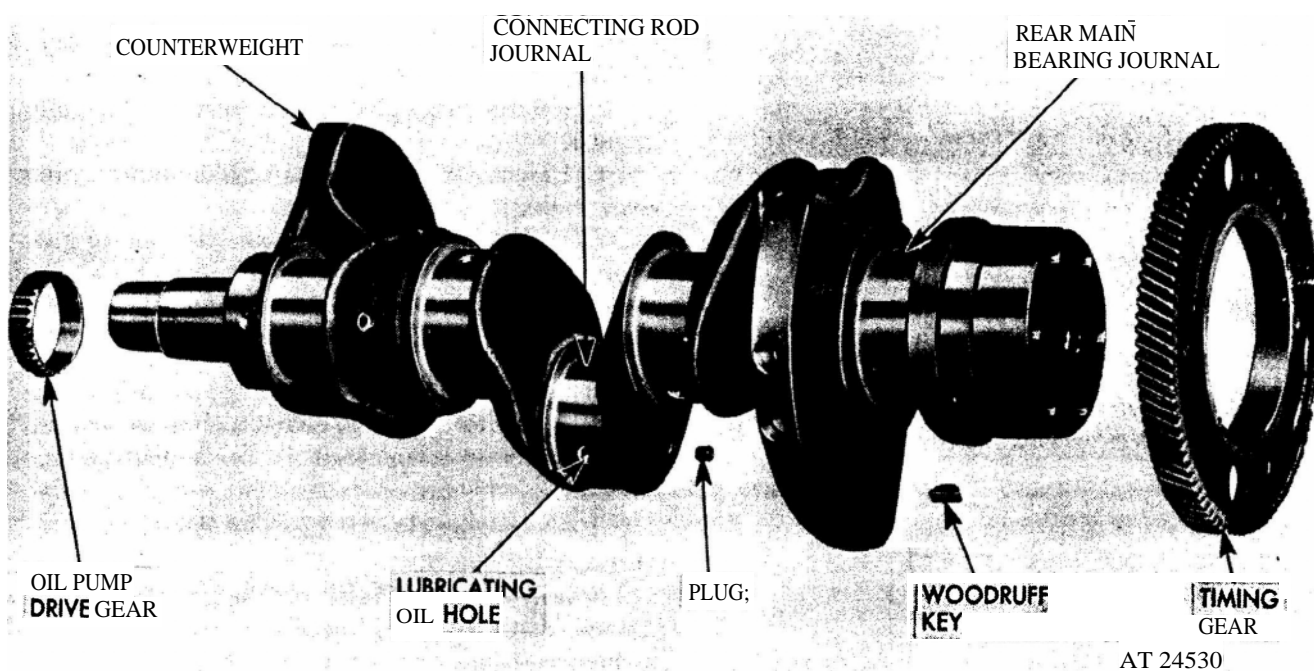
Crankshaft details and relative location of parts—three cylinder in-line engine crankshaft shown.
